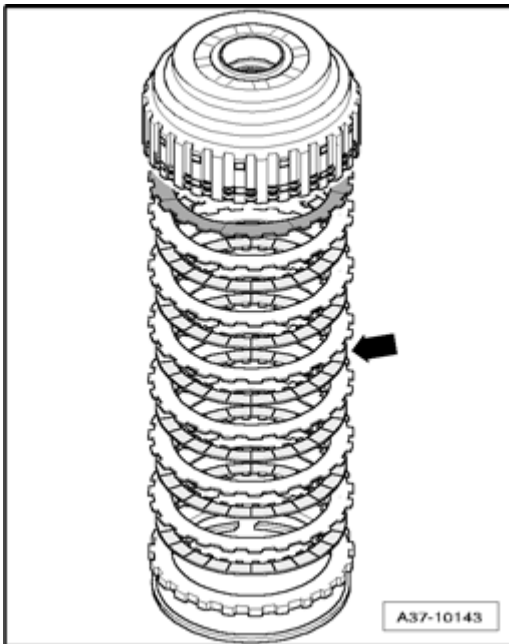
Multiple-Disc Clutch "B" Burnt Out
